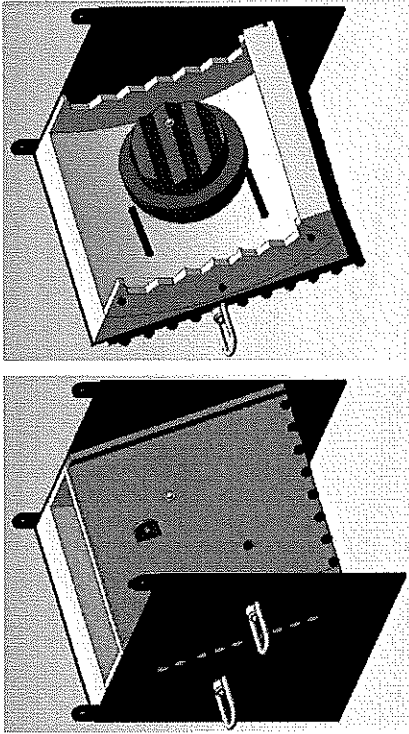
RENDER OF THE PSR MOLD IN THE "LOWER PLENUM OUTLET" CONFIGURATION: FULL ASSEMBLY (LEFT) AND FRAME WALL, MOLD CAP, AND INSIDE PLATE REMOVED FOR CLARITY (RIGHT).
